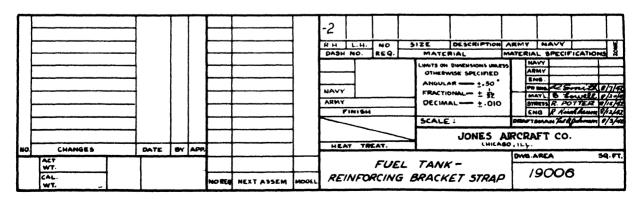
TITLE BOX FOR AIRCRAFT DRAWING
